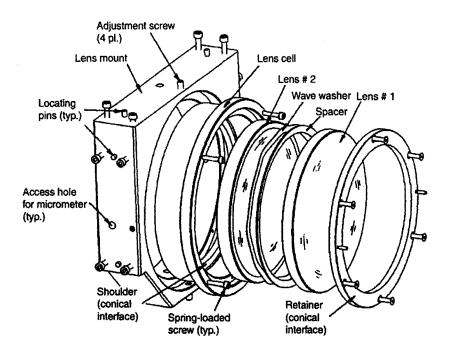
Exploded view of a lens assembly with an axially compliant lens constraint and adjustable mechanical centration. (From Stevanovic and Hart.²⁶)
